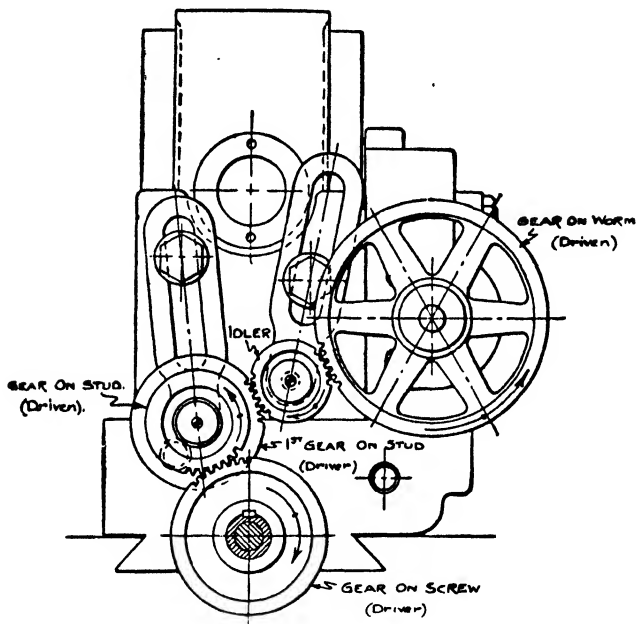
Arrangement of Wheels for Left-Hand Thread.
